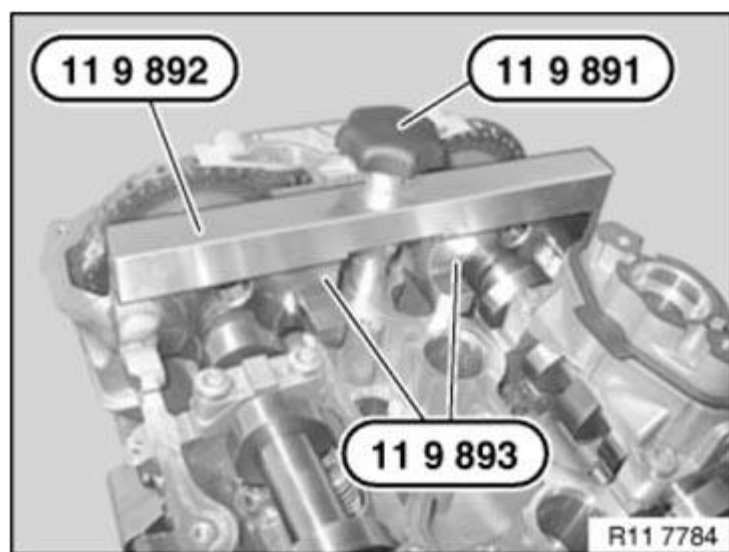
Positioning Special Tool 11 9 892 On Special Tool 11 9 893
